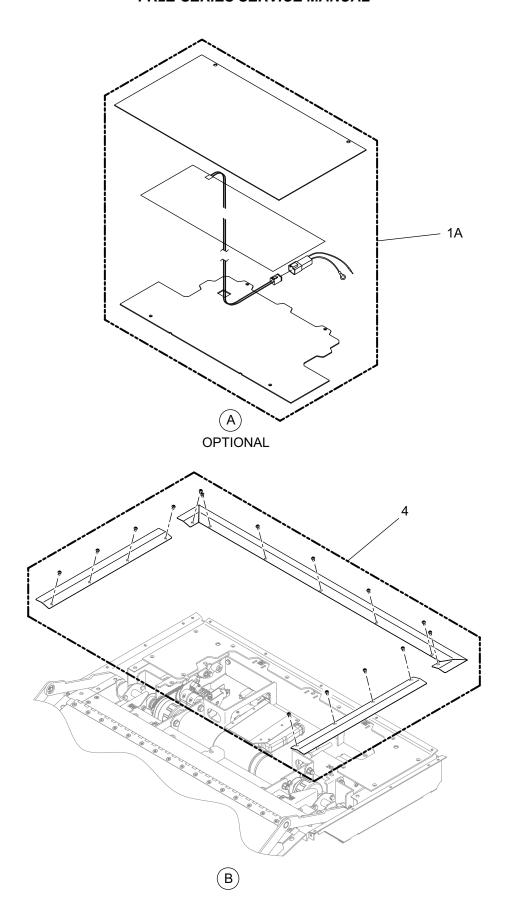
FR2E-SERIES RAMP ASSEMBLY (SHEET 2 OF 5)
